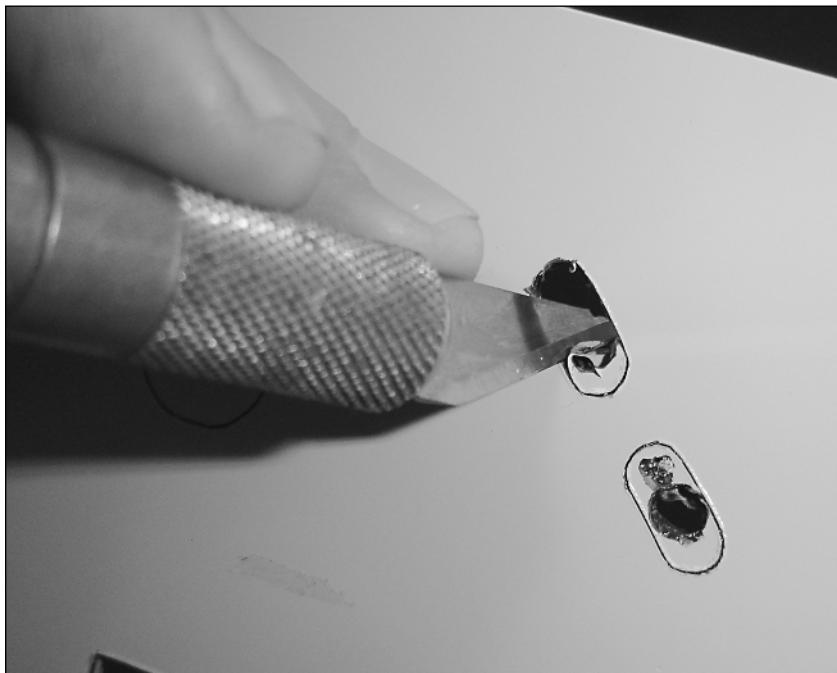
Grabbing through drill hole and bending plastic apart.
